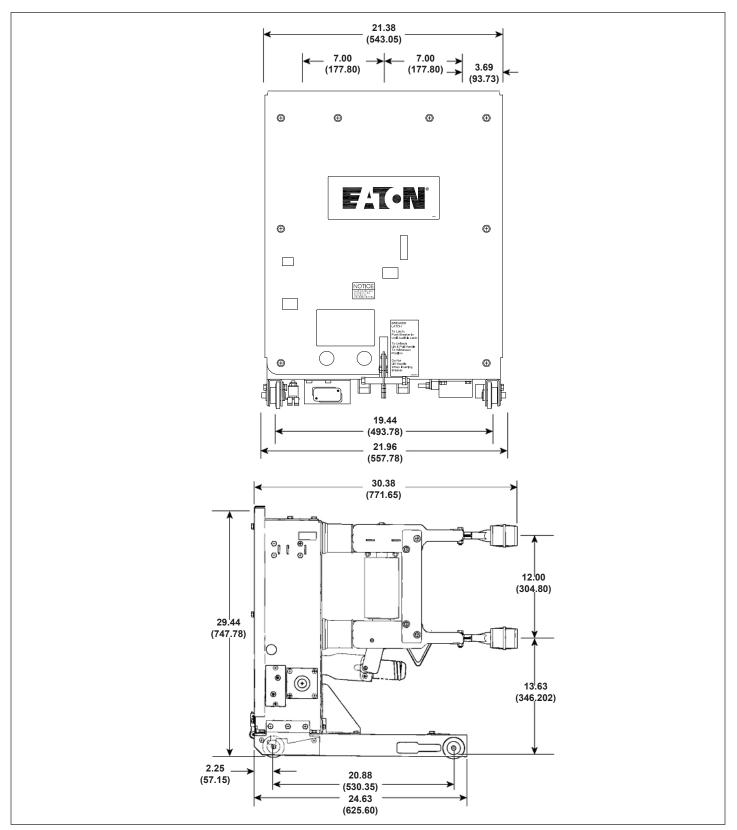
Type VCPW-ND circuit breaker outlines and dimensions in inches (mm).
